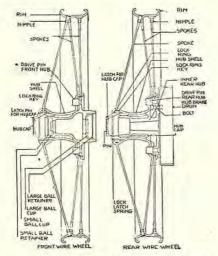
Rear wire wheel with 30 x 3½ clincher rim Note the brake drum attached to the hub flange.
